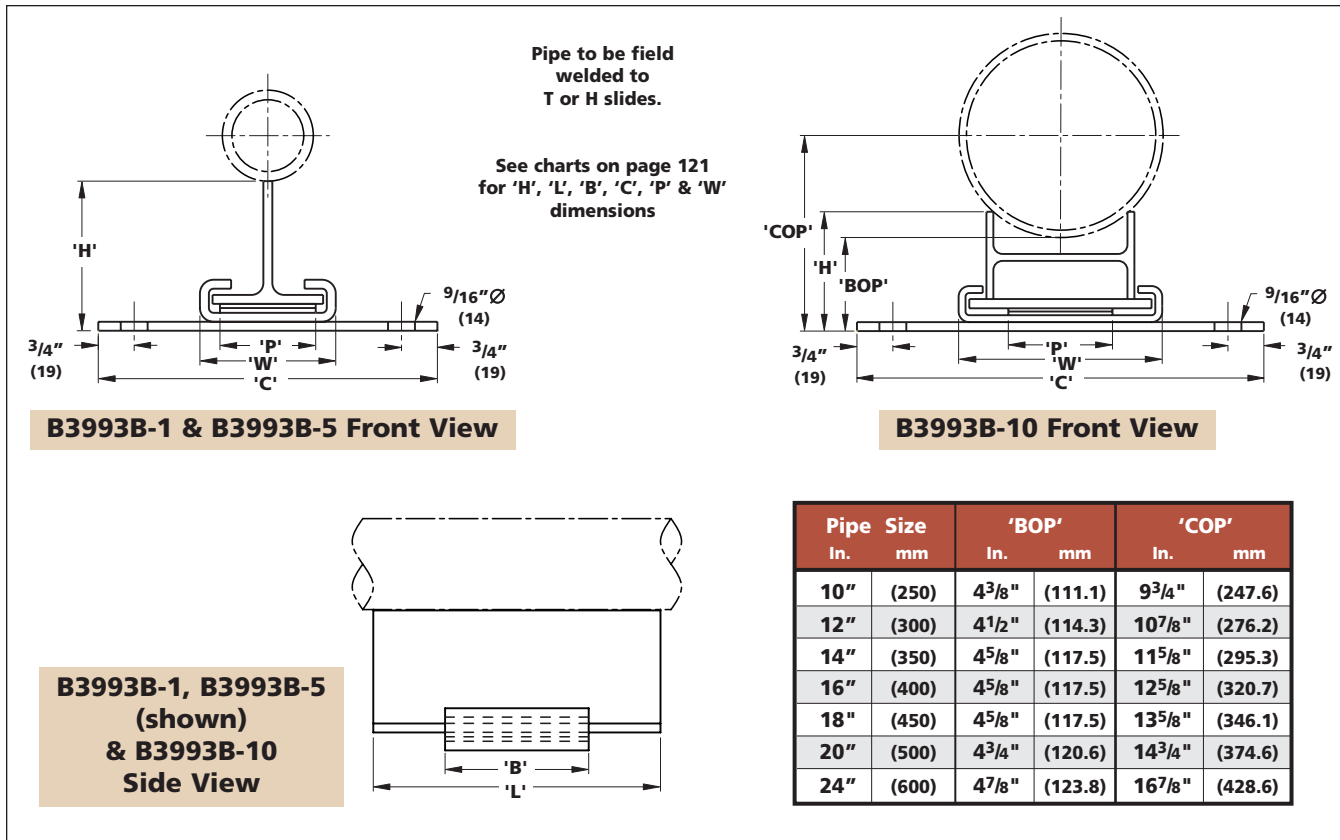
Pipe Slide Assembly Series dimensional drawings
